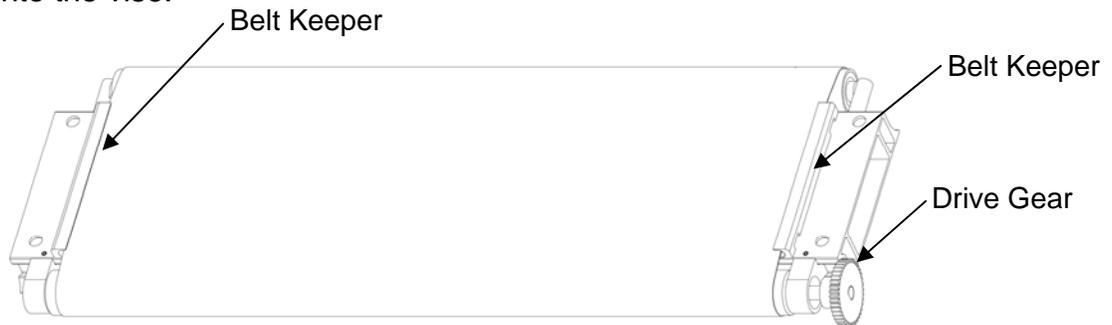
BOTTOM VIEW OF THE FRONT BELT TRAY SHOWING THE BELT KEEPERS
